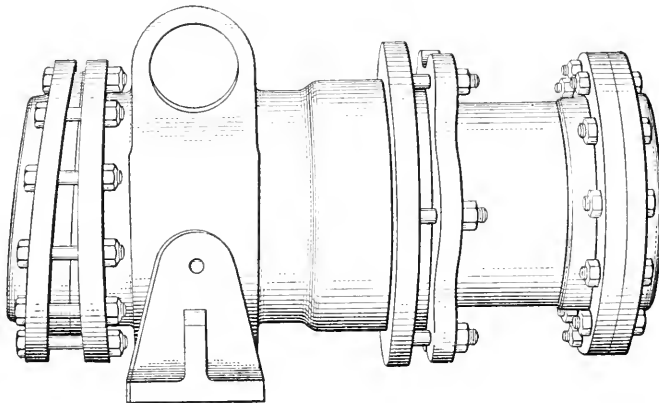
SINGLE EXPANSION JOINT FOR UNDERGROUND WORK.
